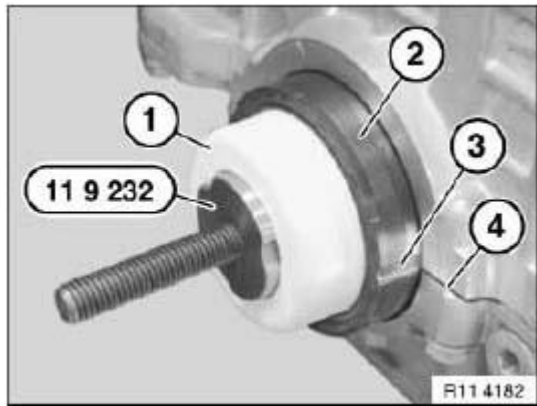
Identifying Support Bushing, Crankshaft Radial Seal, Groove And Crankcase Partition
